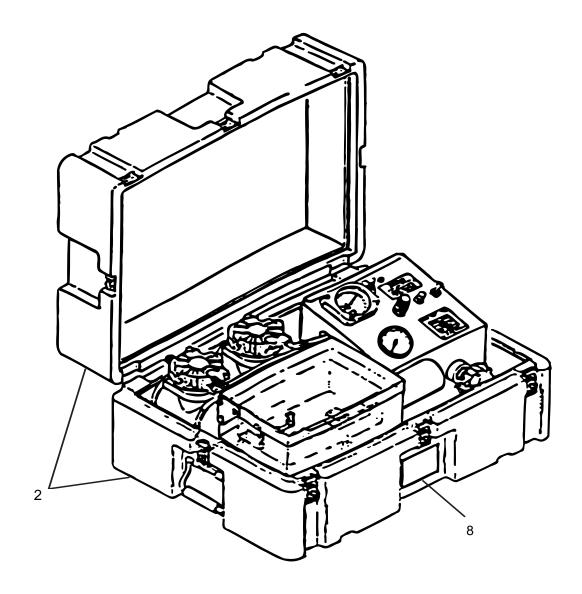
TEST CHAMBER ASSEMBLY, MODEL 452 (SHEET 1 of 2)
